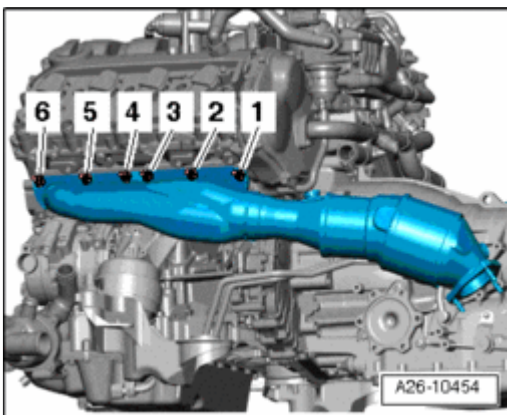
Removing Nuts And Left Exhaust Manifold With Catalytic Converter
